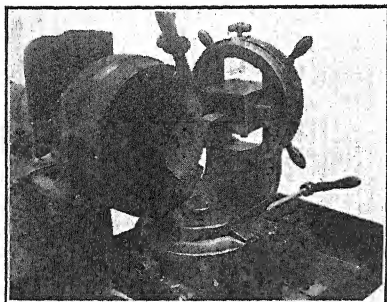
First Position of Tool for Grinding the Back and Side Rake.
